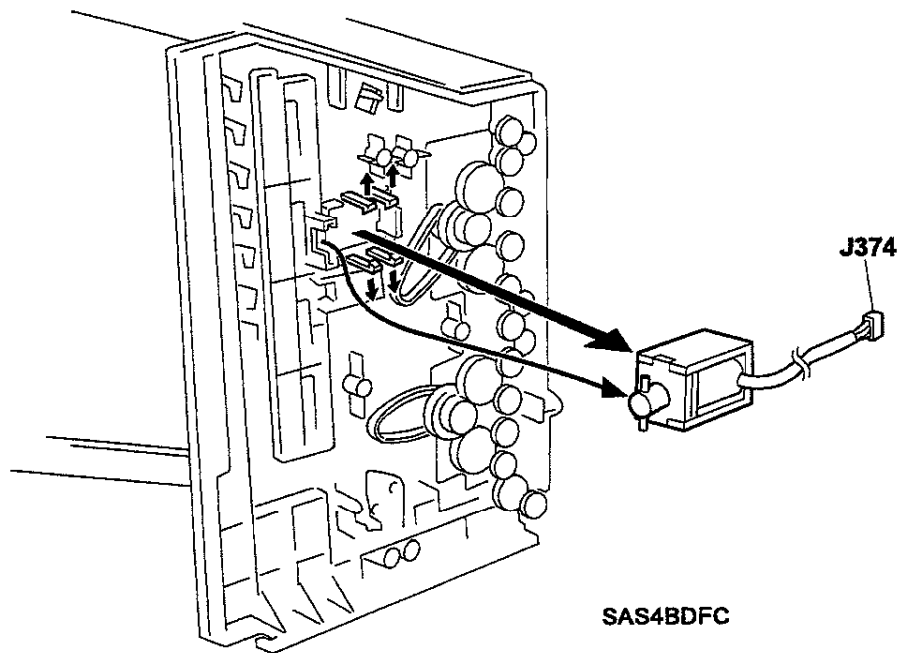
Removing the Right Solenoid Assembly
